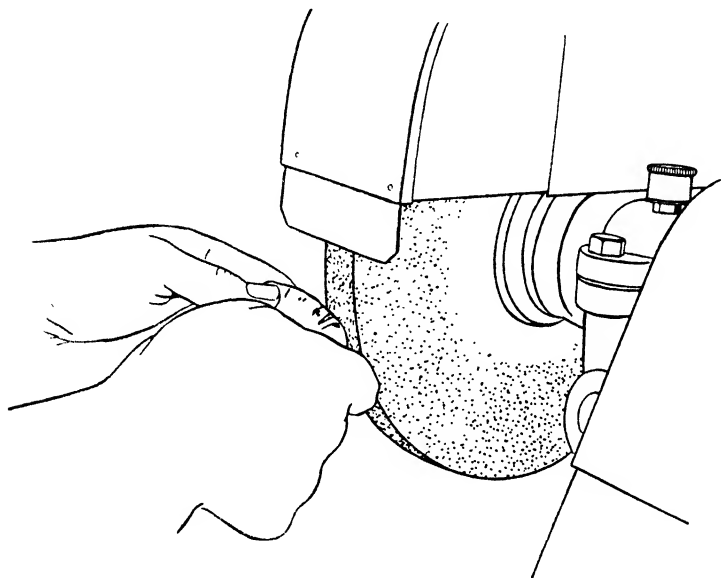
Roughing a gem stone on the periphery of a silicon-carbide grinding wheel
